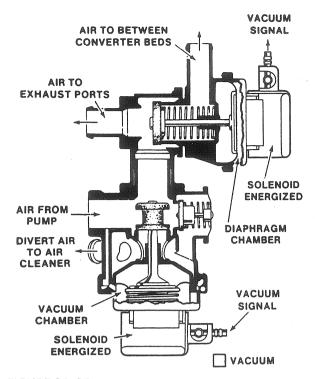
EDES valve directing air to the converter. (Courtesy of General Motors Corp.)
